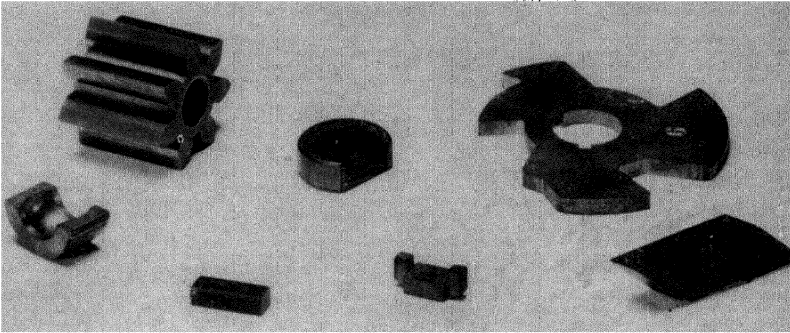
Variety of machine parts from sintered steel (courtesy of Moraine Products Division, General Motors Corp.).
